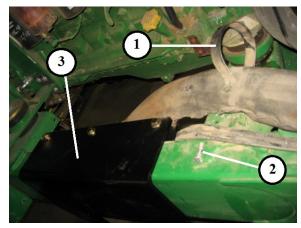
LH Side Mounting Location Key 1 – P-Clamp Key 2 – Bolt Removed from P-Clamp Key 3 – LH Frame Plate
